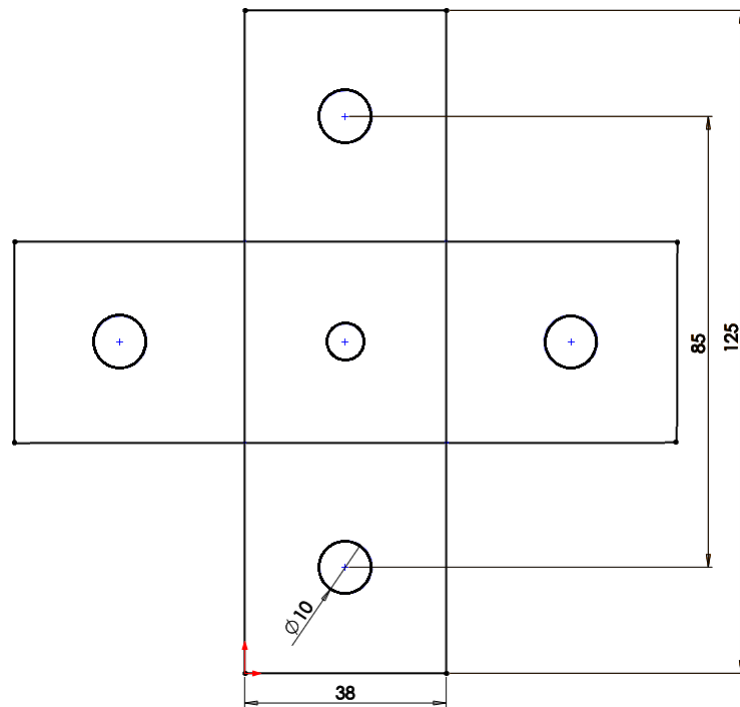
Cross-tension test piece. All dimensions in mm. Taken from [92]
